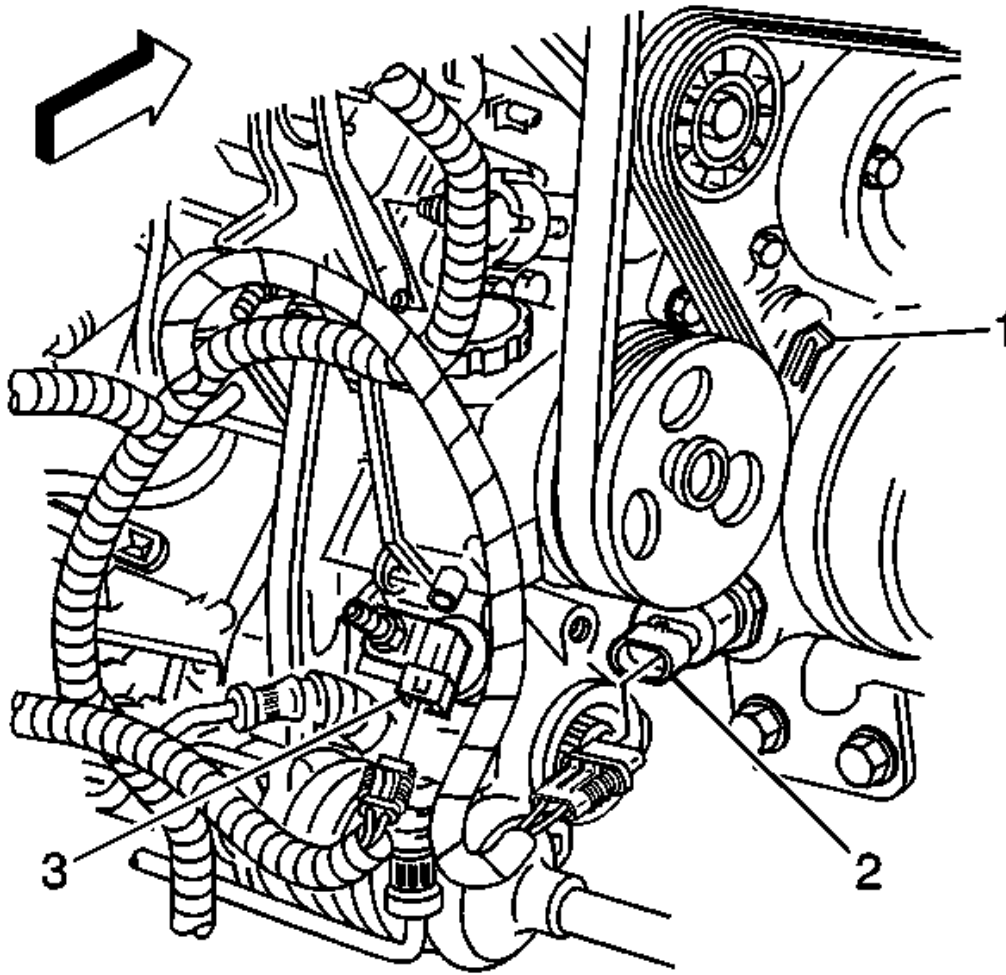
View of Oil Pressure Sensor & Vehicle Speed Sensor
